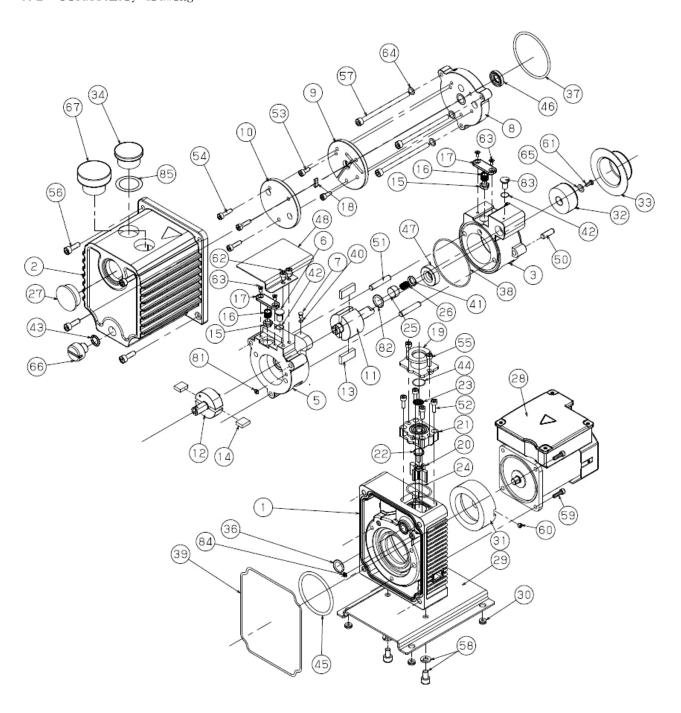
Disassembly drawing of GHD-031 oil sealed rotary vacuum pump
